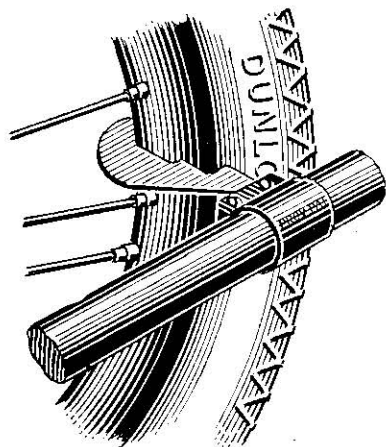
REAR WHEEL ALIGNMENT GAUGE (1932-5 Horvyweights)
